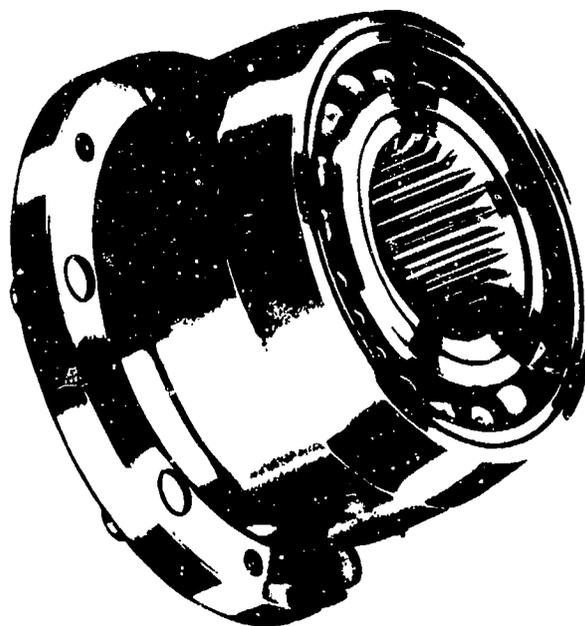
Sprag Overrunning Clutch Assembly Used on UH-2C
